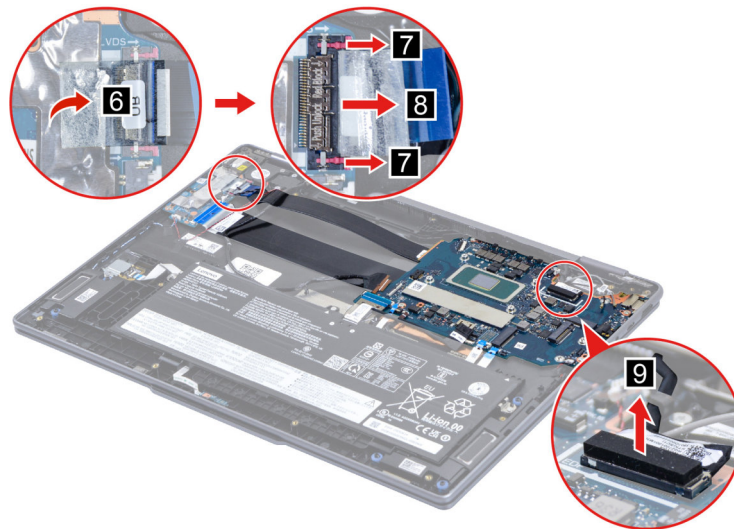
Disconnect the LVDS cable connected to the I/O board and disconnect the EDP cable from system board (Intel models)
